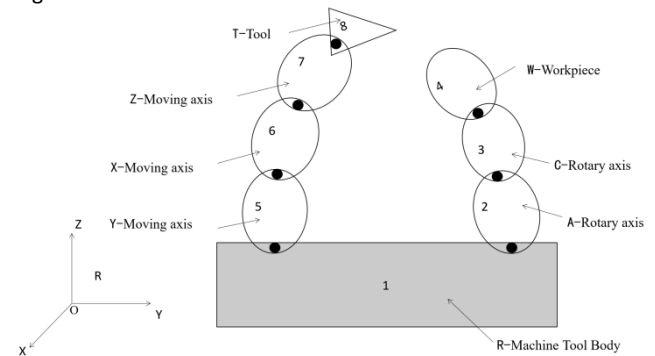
The topological structure diagram of the A-C double-turn machine tool.
